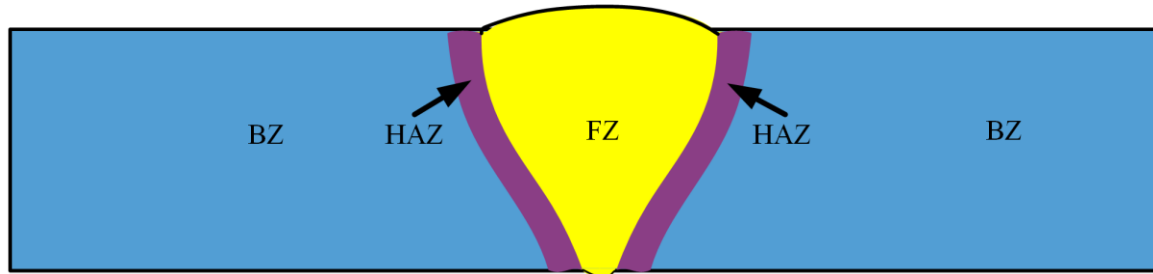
Schematic view of the cross section of welded joint
